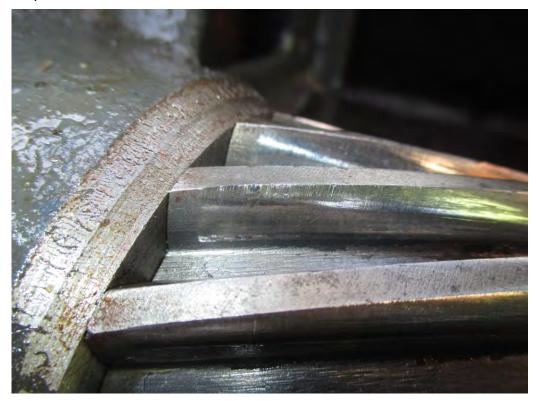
South Primary Reducer. View of east first reduction gear set, opening face of gear teeth at outboard (right) end of the teeth. Closeup view of photo 19.
